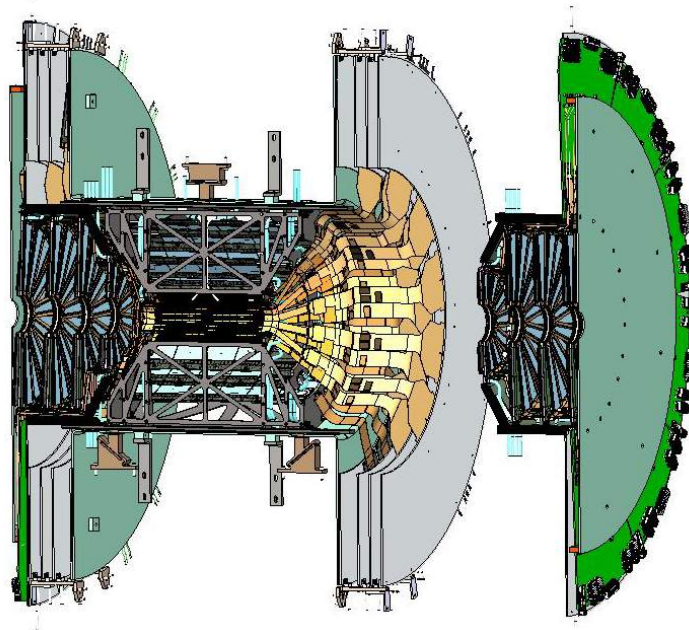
A drawing of the combined VTX/FVTX assembly. One FVTZ quadrant is displaced for clarity.
